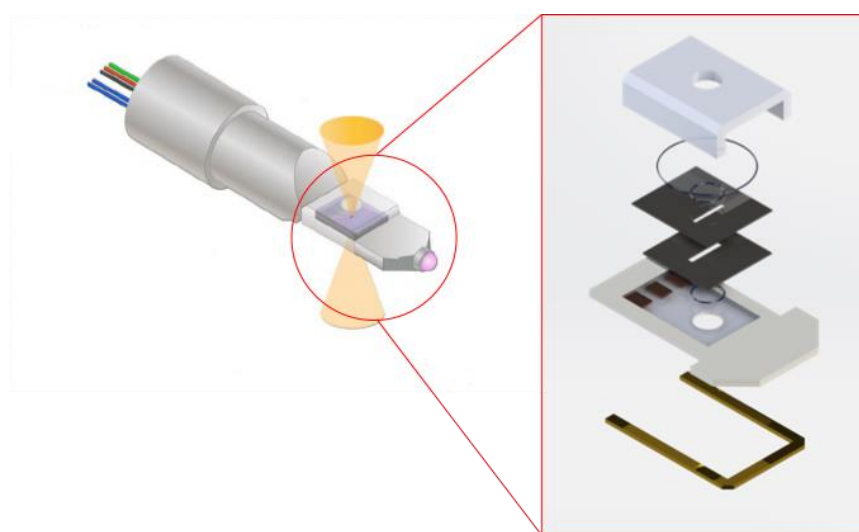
Illustration of the liquid cell tip with exploded view of internal tip assembly. Seen from top to bottom of exploded view, retaining plate, top O-rings, Electrochemistry chip, spacer chip, bottom O-rings, electrochemical tip, slide pin. Zoomed out view of tip adapted from Ref (7)
